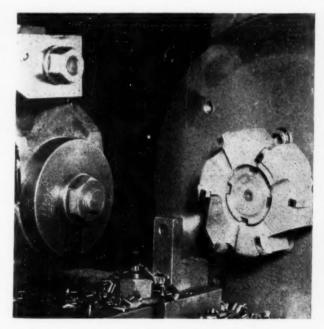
ACTUAL INSTALLATION OF SETUP IN FIG. 5, MILLING ALLOY FORGING FOR LANDING GEAR
